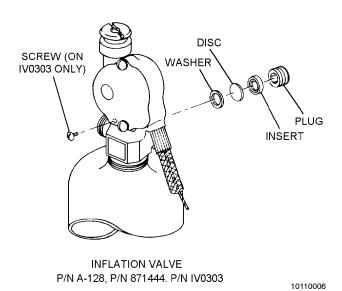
Disassembly of Inflation Valve Safety Disc Assembly
